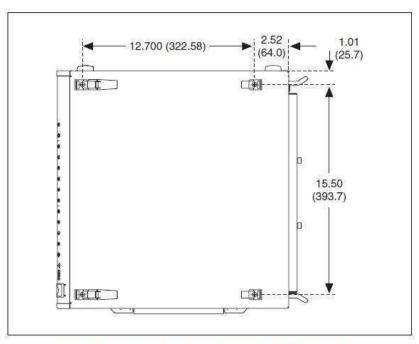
PXI-1044 Dimensions (Bottom) in Inches (mm)
